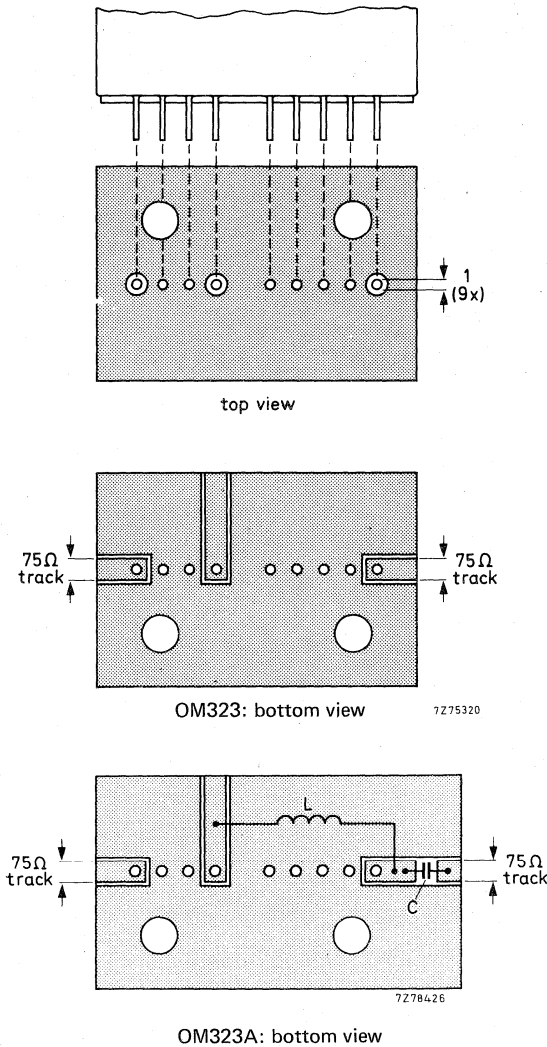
Printed-circuit board holes and tracks for the OM323 and OM323A.
